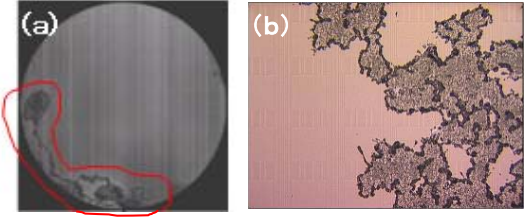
(a) Pattern-defective wafer and (b) the enlarged view of the defects caused by abnormal discharge in an aluminum sputtering tool.
